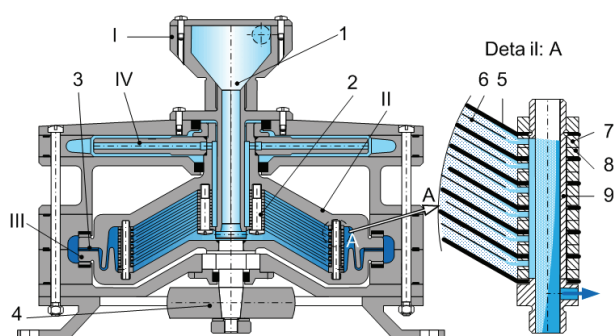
Centrifugal separator – prototype. 1. Vortex tube, 2. rotor; 3. pump; 4. compressor.
